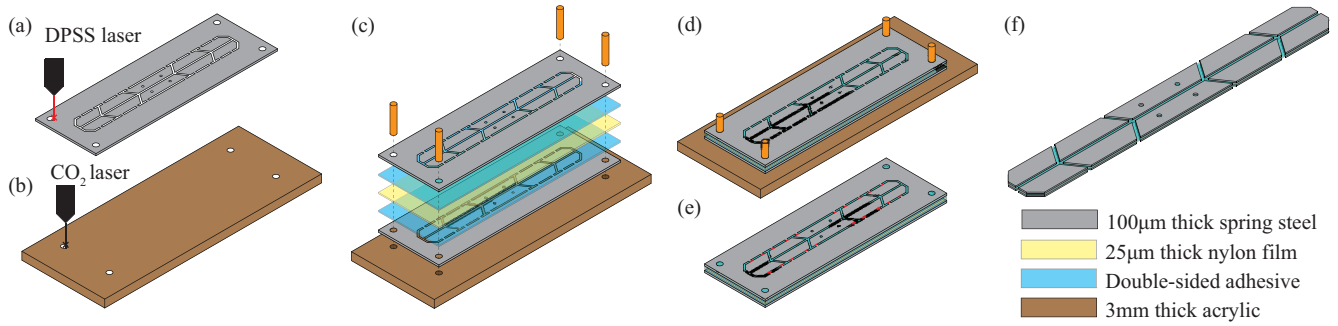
Fabrication of the origami string. (a) Two sheets of 100µm thick spring steel were laser machined with thin tabs connecting the plates. (b) A 3 mm thick acrylic base was laser machined. (c) 25µm thick nylon film was pin-aligned and sandwiched between the steel sheets. All three layers were bonded using double-sided tape. (d) The pins and acrylic base were removed. (e) The tabs were cut using a precision knife. (f) The finished string.
